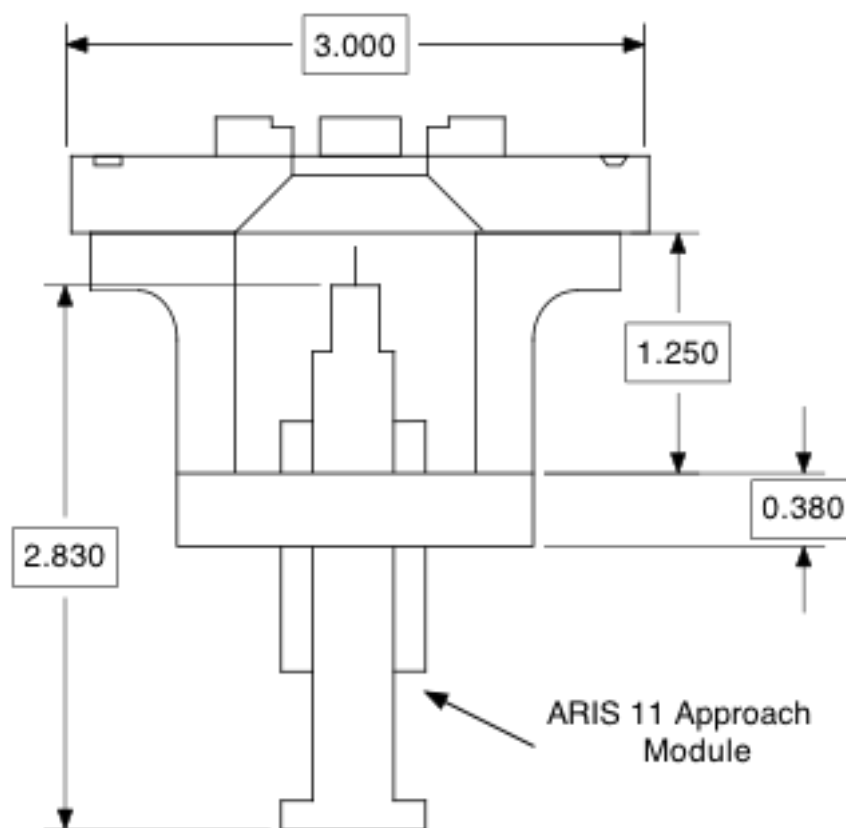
A 1:1 scale drawing of the STM head assembled with the Burleigh ARIS-11 approach module mounted
